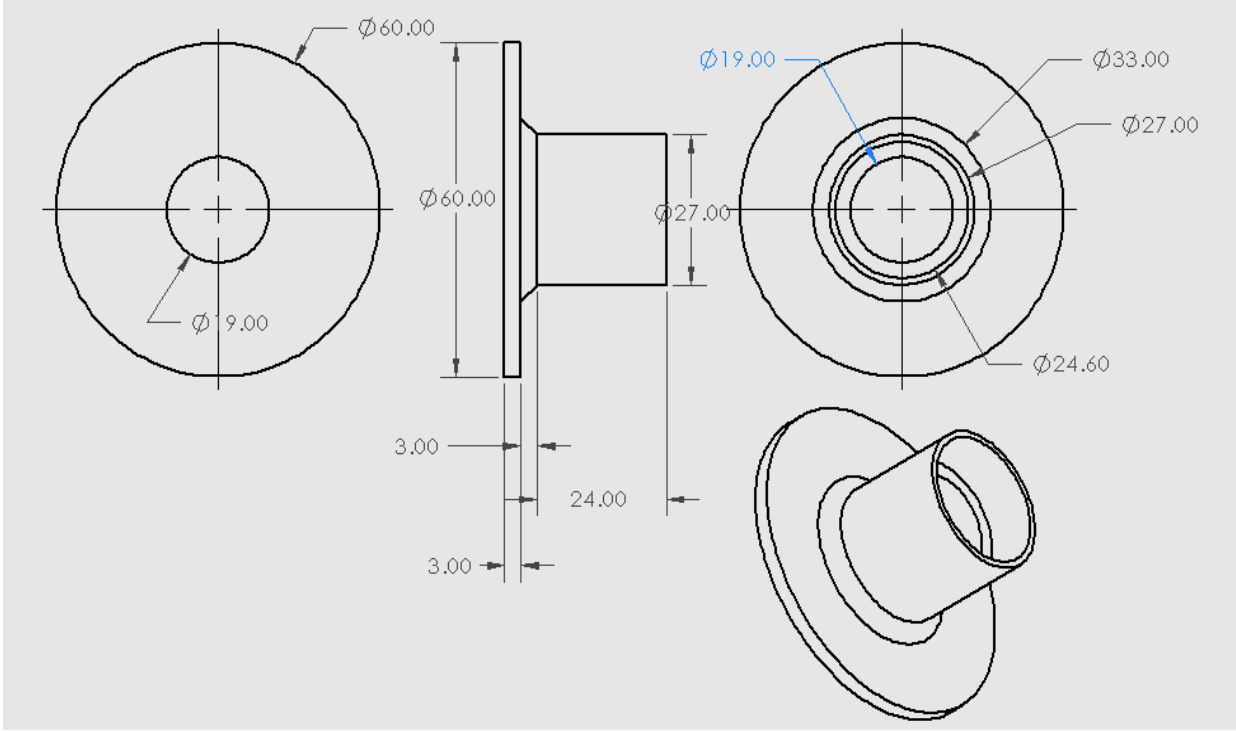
Drawing of the shaft holder (Scale: 1:1, unit: mm).
